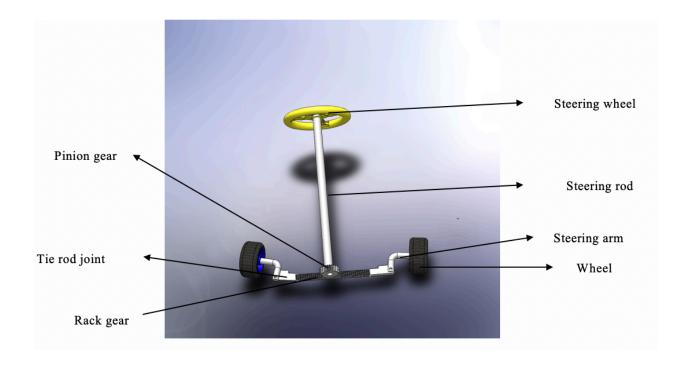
STEERING ASSEMBLY IN SOLIDWORKS
